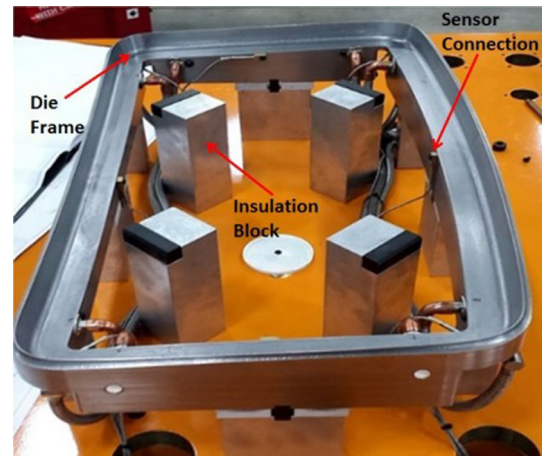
Heating tool used in the thermally assisted manufacturing process on insulation blocks.
